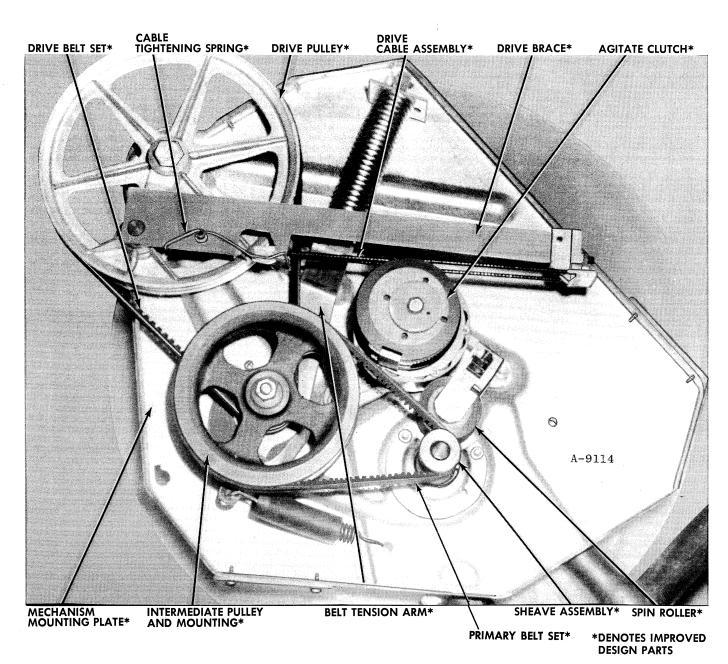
Washer Mechanism, Motor and Snubber Parts Removed
